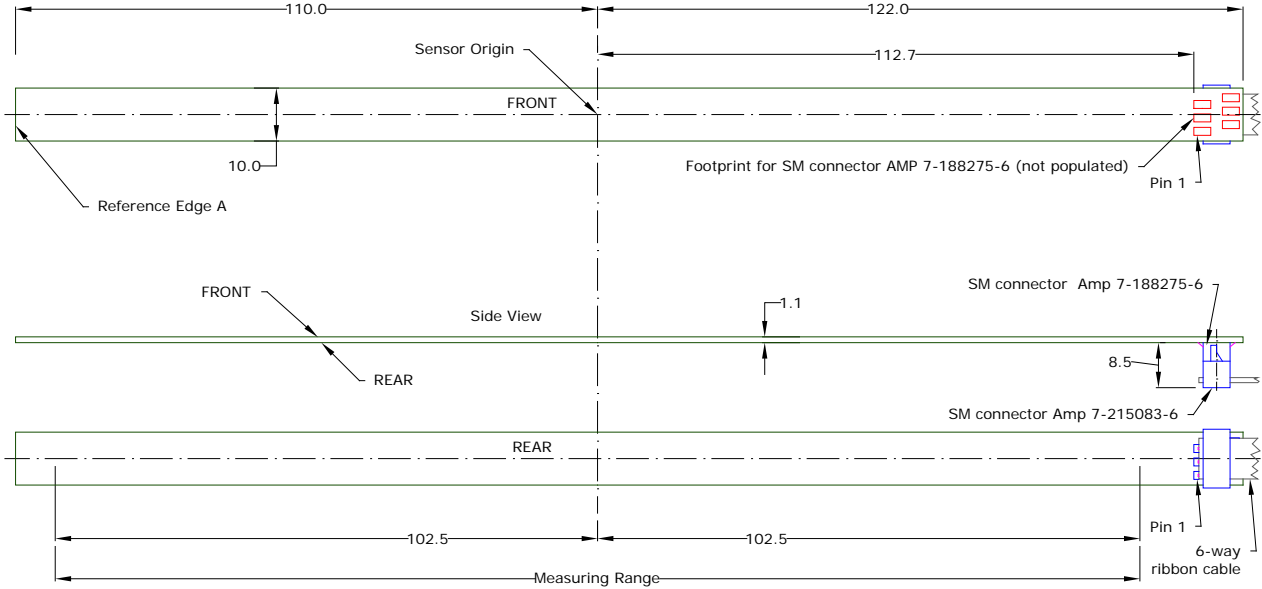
Mechanical drawing, sensor PCB assembly 013-0035 shown with mating connector 013-6001
